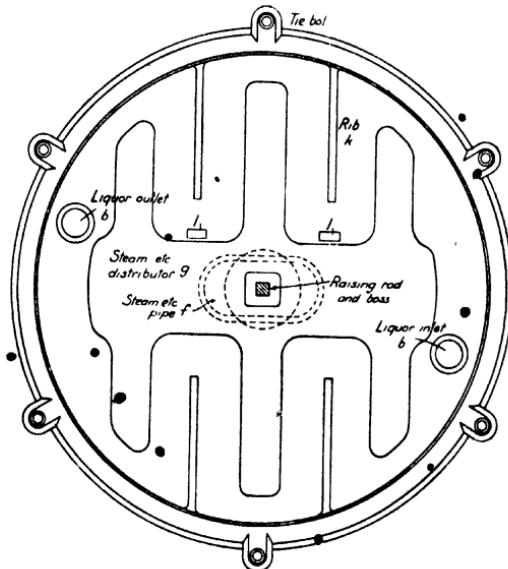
C. & W. Walker Still. Plan of a Chamber.
